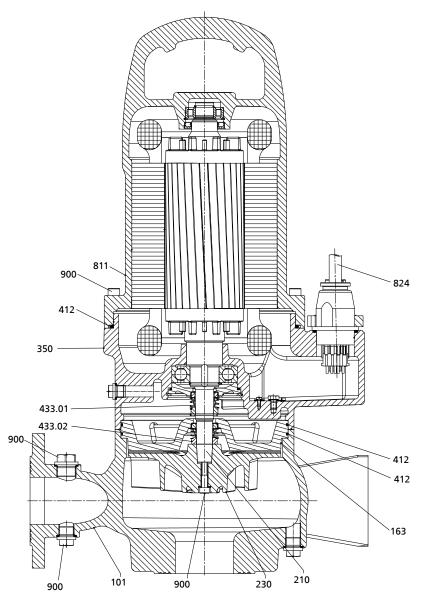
General assembly drawing, example: Amarex KRT F 65-215
